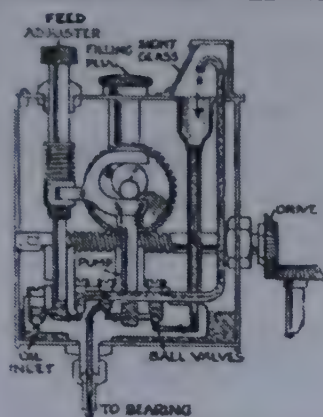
Mechanical Pump Lubricator, with plunger pump and sight glass. The oil is pumped up to the sight and thence pumped direct to the bearings. It is power driven.
